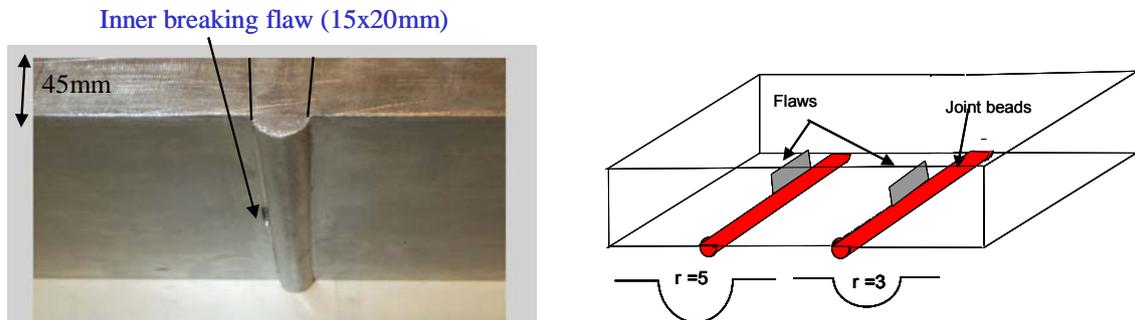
scheme of the new mock-ups in which was manufactured a bead to simulate the longitudinal deposit of weld metal produced by a fusion-welding process
